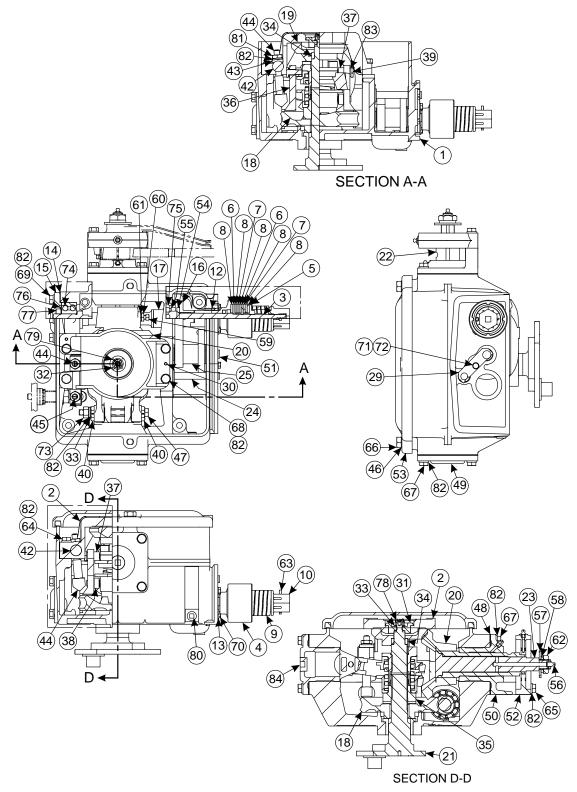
M-23A/M-223B IPD Switch Machine Gearbox
